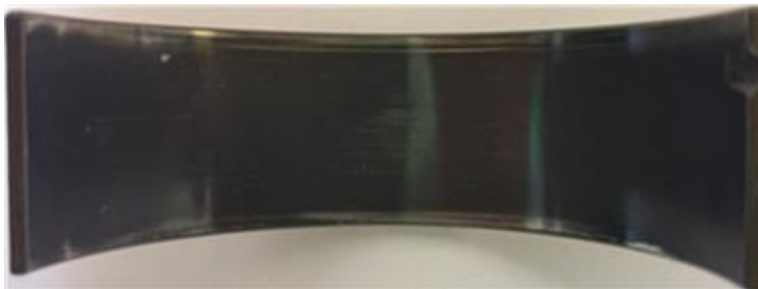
King Steel-Aluminum HP bearing Coated with K-40 after Direct Friction Test
